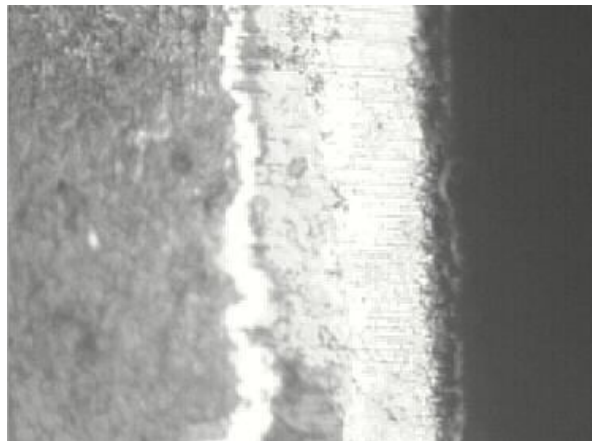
(s) The microscopic view of wear at cutting condition of at spindle speed 620 rpm, feed 0.08 mm/rev and depth of cut 1.2 mm
